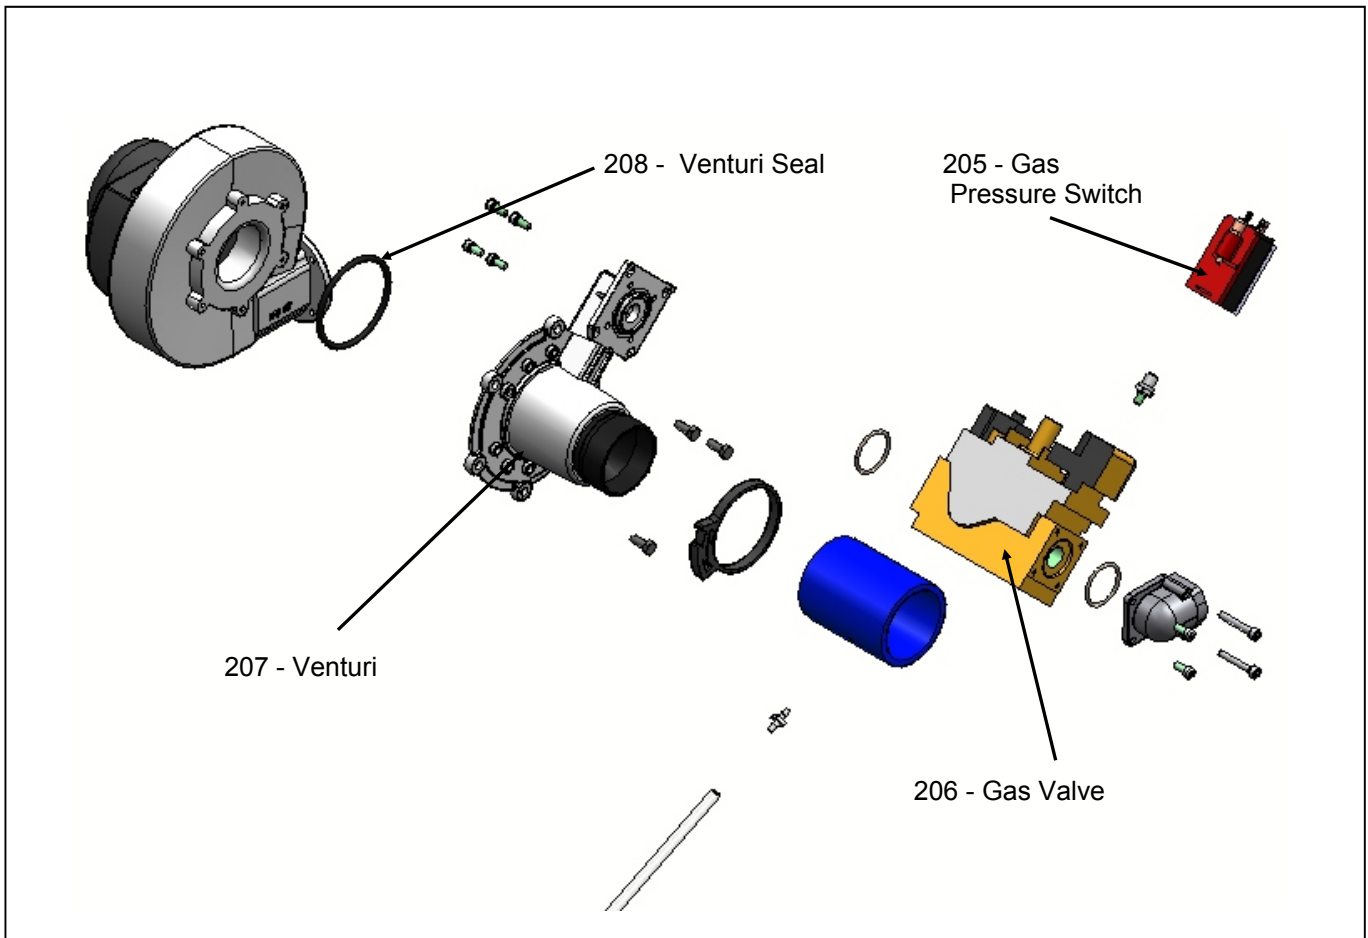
Gas Valve Assembly Models PV95c/110c/140c
